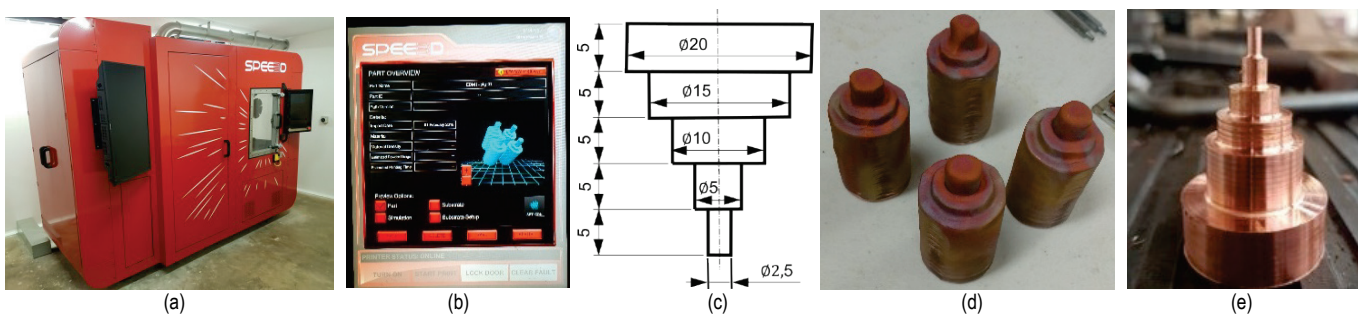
Electrodes were produced on the LightSPEE3D printer (a) using a pre-set geometry as displayed on the HMI (b), with dimensions given in mm (c). The as-printed samples (e) were then heat-treated according to Tab. 1, then machined on a lathe to produce the SP3D printed electrode (f).
